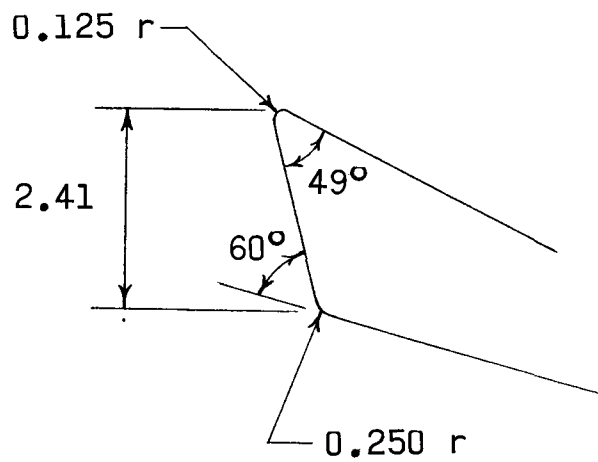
Drawing of test model. All dimensions are in inches unless otherwise specified.
